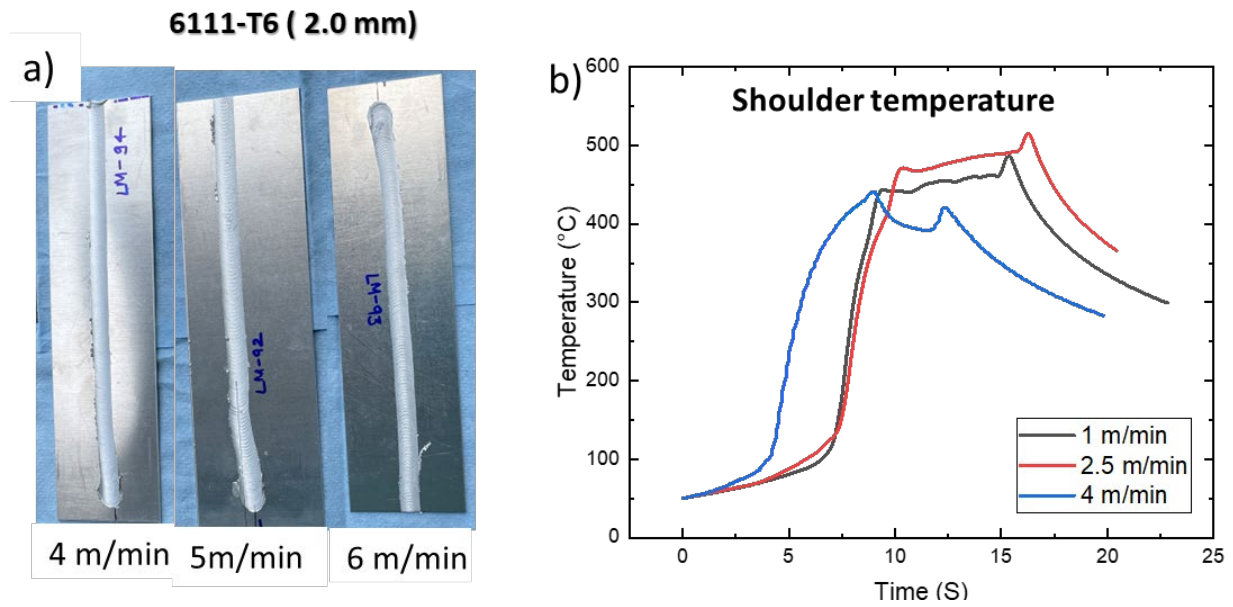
(a) Samples processed at 4, 5, and 6 m/min speed using a robotic platform. (b) Shoulder temperature at the shoulder tip of the FSP tool. Source: PNNL.
